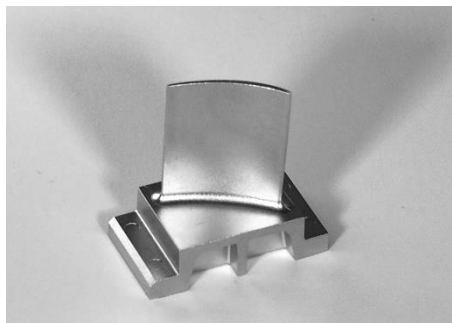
The high pressure compressor (HPC) vane of a turbine engine (courtesy Schunk Sintermetalltechnik GmbH)
